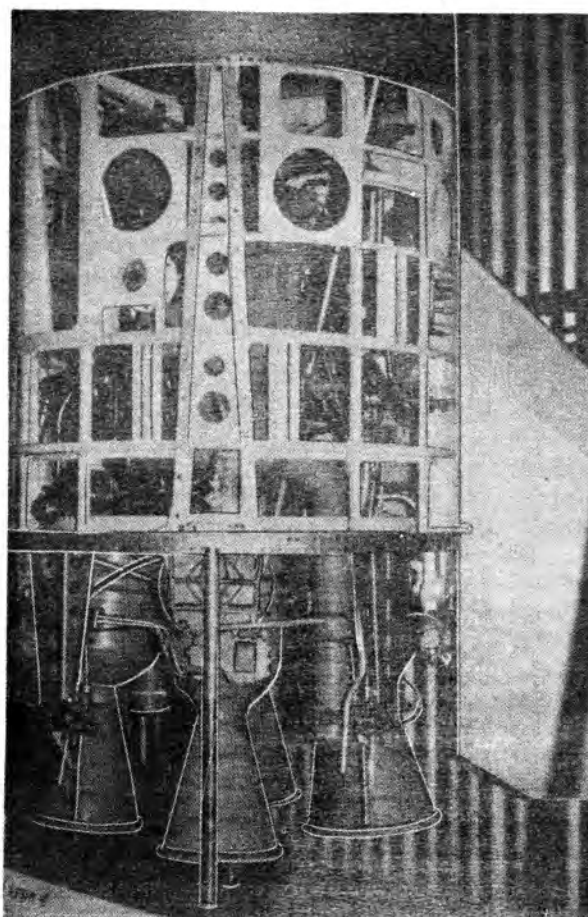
Gamma 304 rocket engine for Black Knight, producing a thrust of 111.2 kN.
